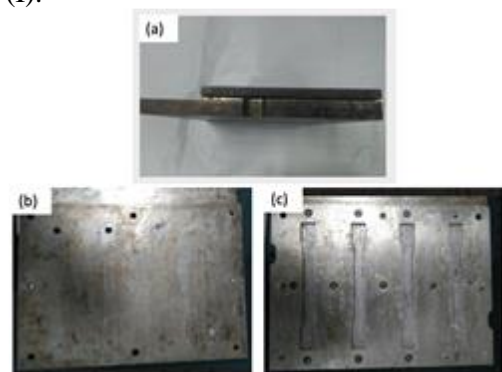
Mold parts for composites (a) closed mold; (b) Top side; (c) Bottom side. According to ASTM D636 (I) rules.
